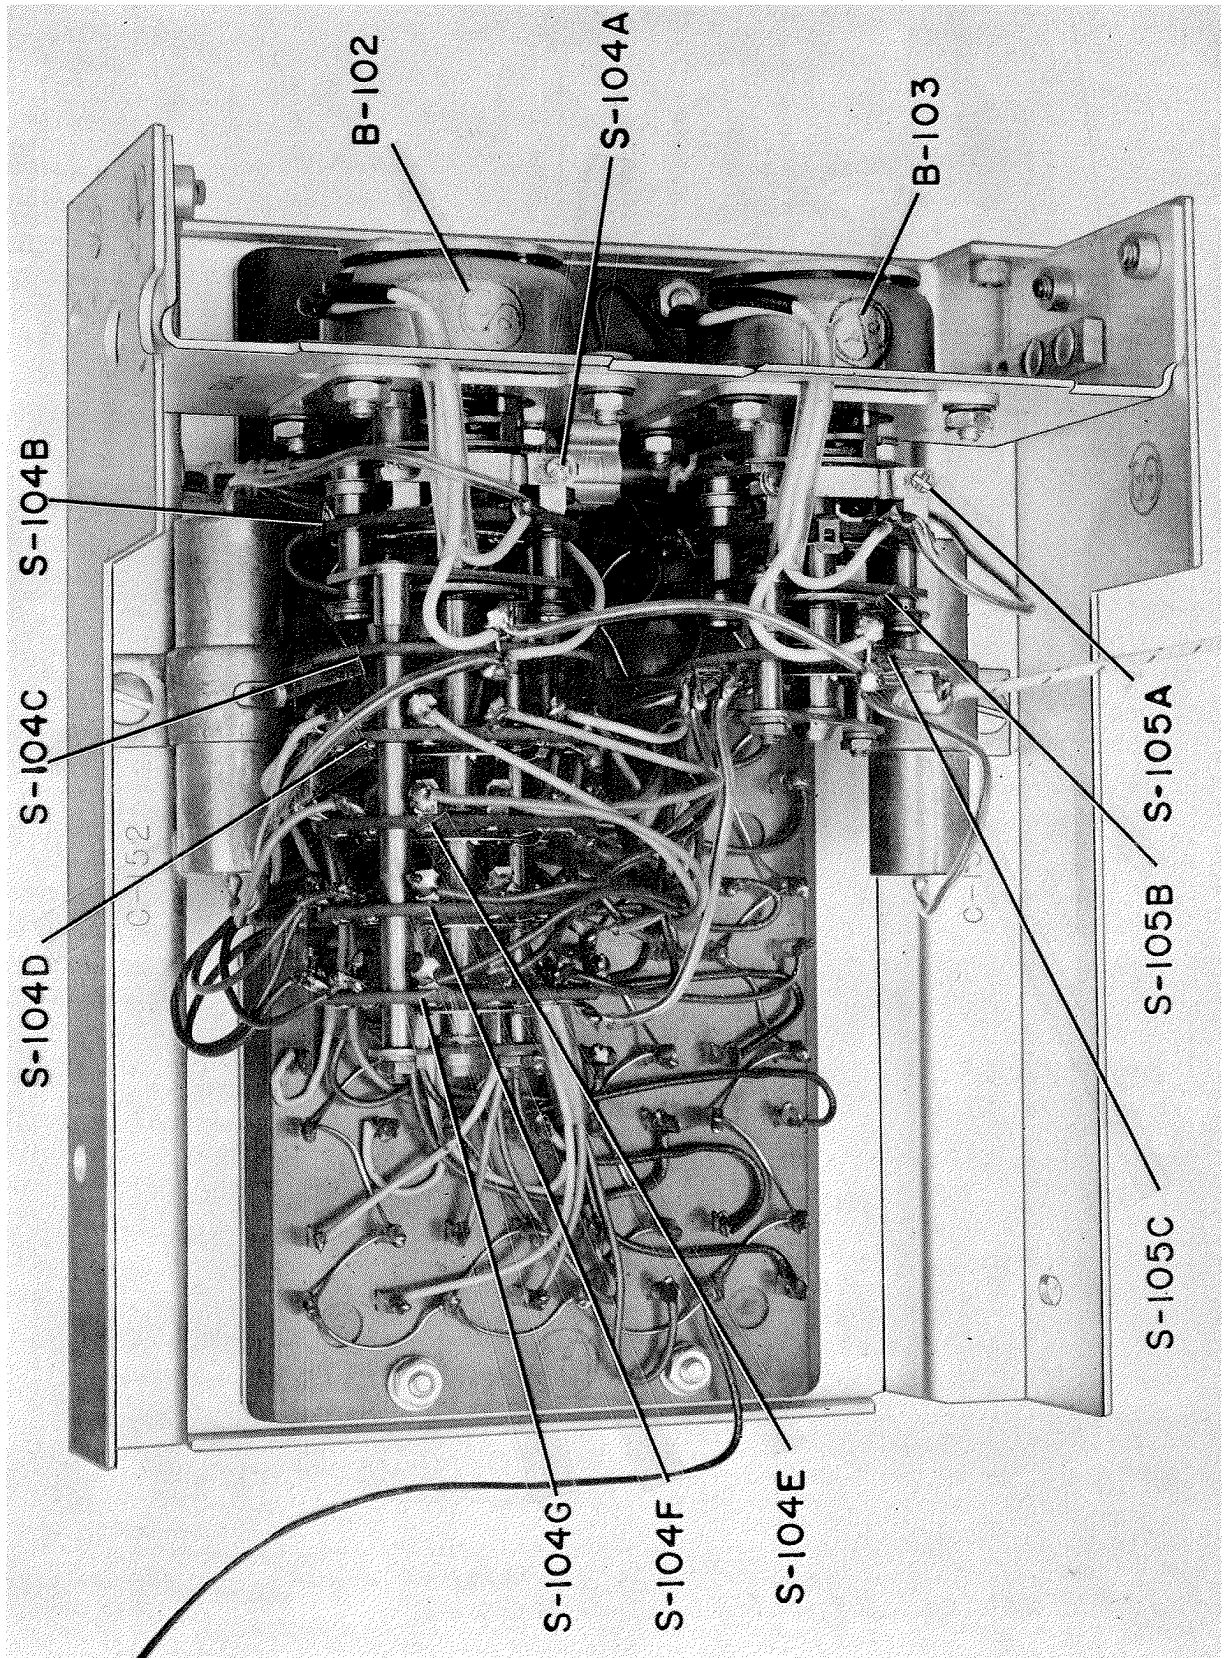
Radio Transmitter T-452/ARC-49—Front Panel Assembly, Rear View
